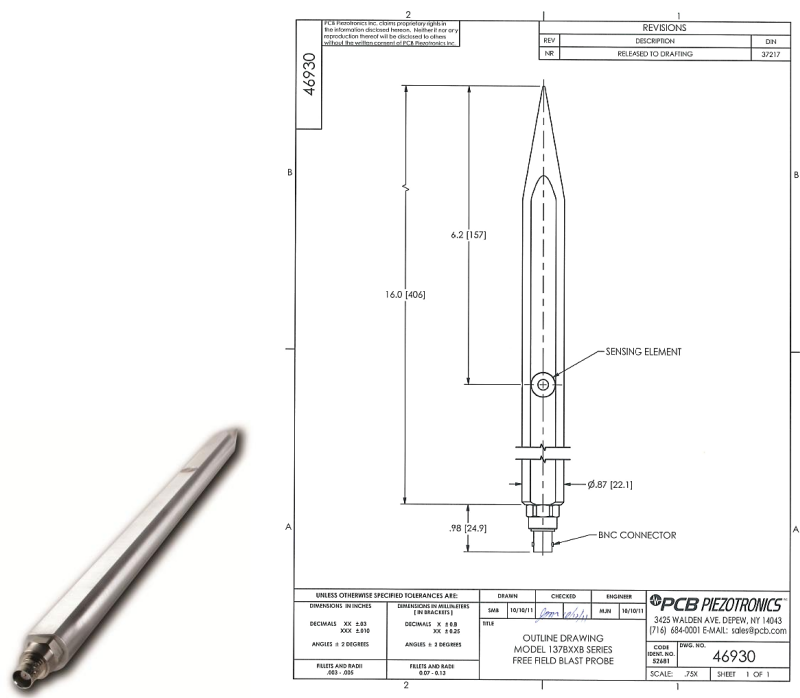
Example of a pressure pencil probe. (Photograph and engineering drawing courtesy of PCB Piezotronics, Inc. Left: <https://www.pcb.com/products?m=137B23B>. Right: PCB Piezotronics. Model 137B23B ICP® Pressure Sensor Installation and Operating Manual. https://www.pcb.com/spec_sheet.asp?m=137b23b.)
